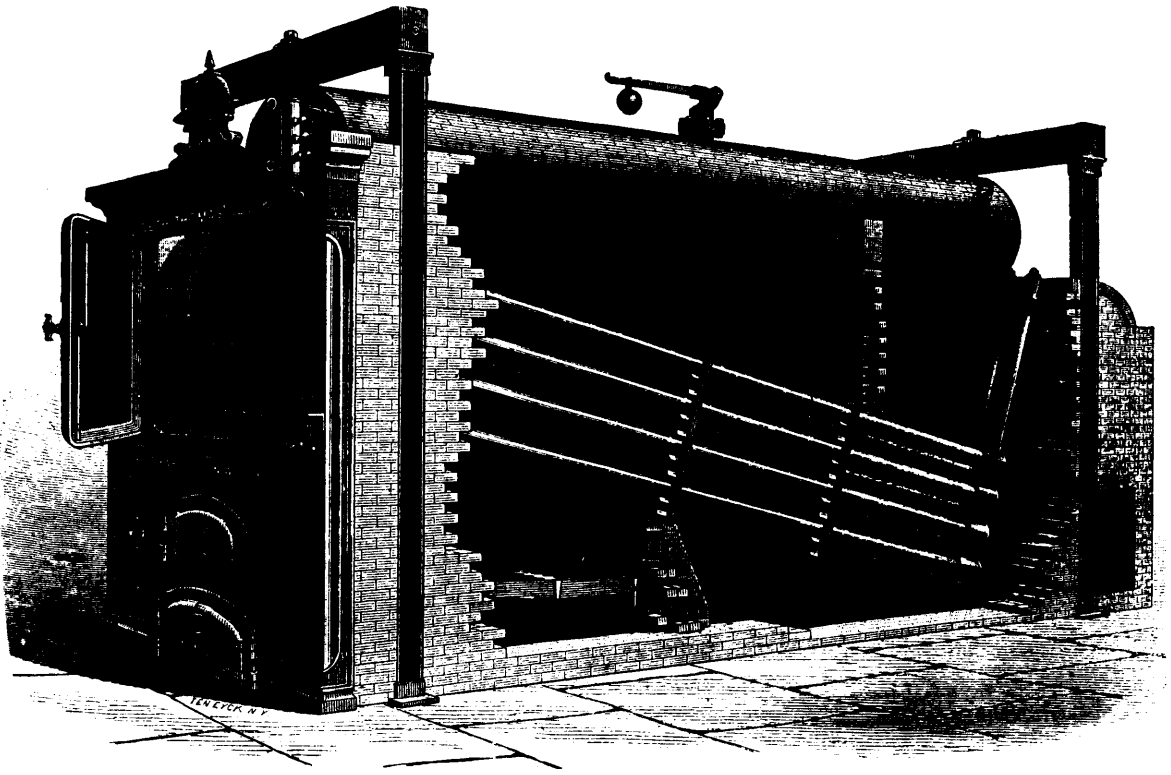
SECTIONAL PERSPECTIVE VIEW OF A BABCOCK & WILCOX BOILER.
